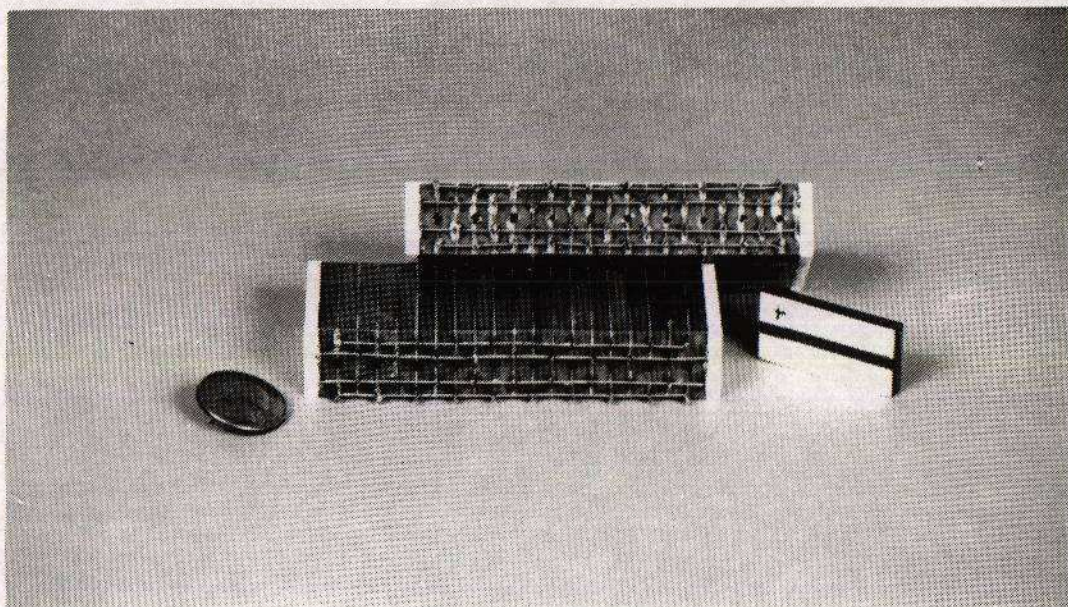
Photograph showing a striped PZT-8 ceramic plate and the entire Stack Assembly used in the Massa TR-1420 Directional Flextensional Transducer
